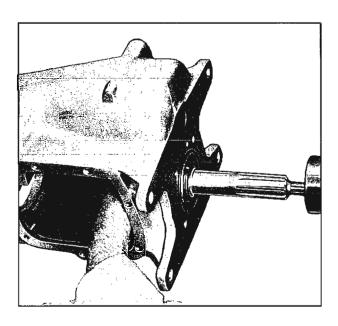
A-18 Removing Main Drive Gear from Front Bearing
